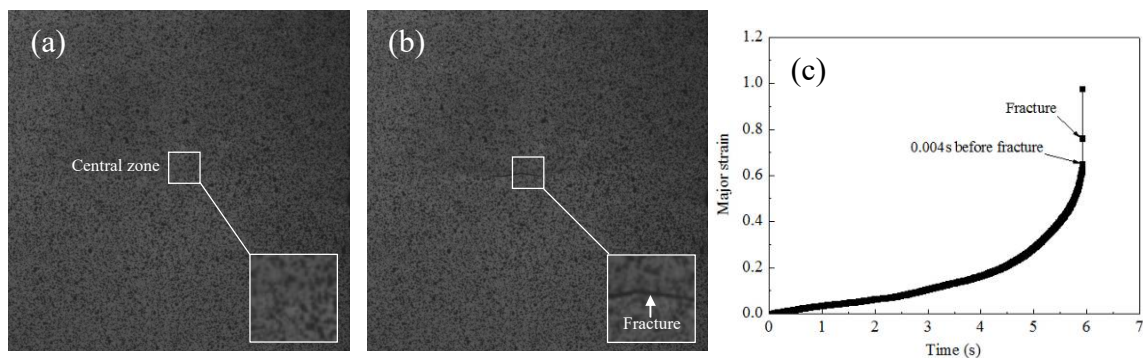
Identification of fracture for DP600 specimen (non-reduced side) under biaxial tension: (a) 0.004s before fracture, (b) fracture, (c) evolution of strain.
